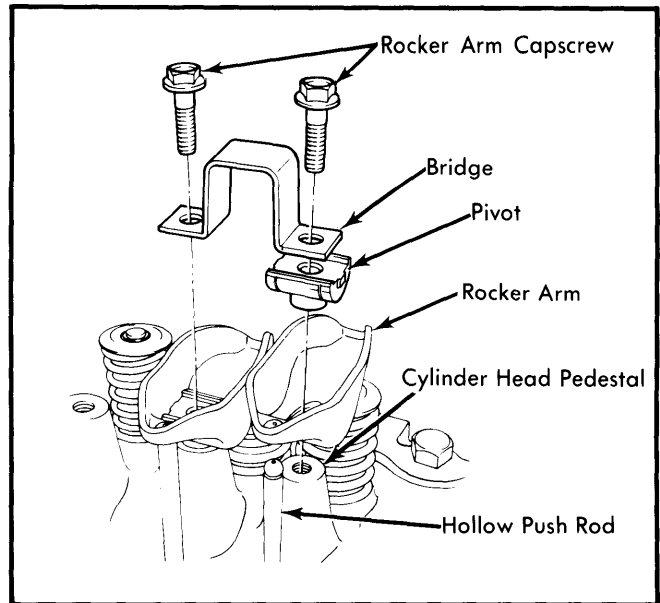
Exploded View of Bridged Pivot Rocker Assembly
